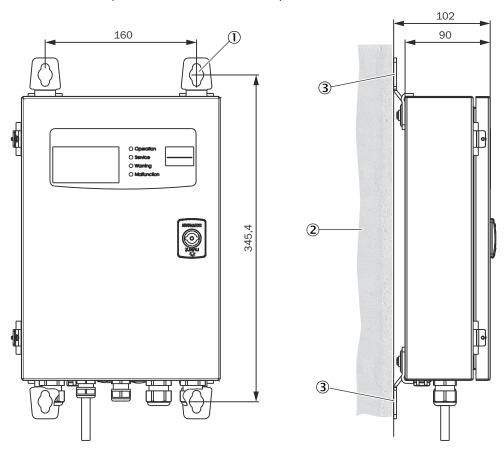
Fitting the control unit AWE, sheet steel enclosure (dimensions in mm)
